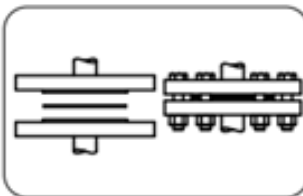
The length of pressure transmitter thread should be longer than the depth of the thread to ensure the seal of head face gasket is effective.
